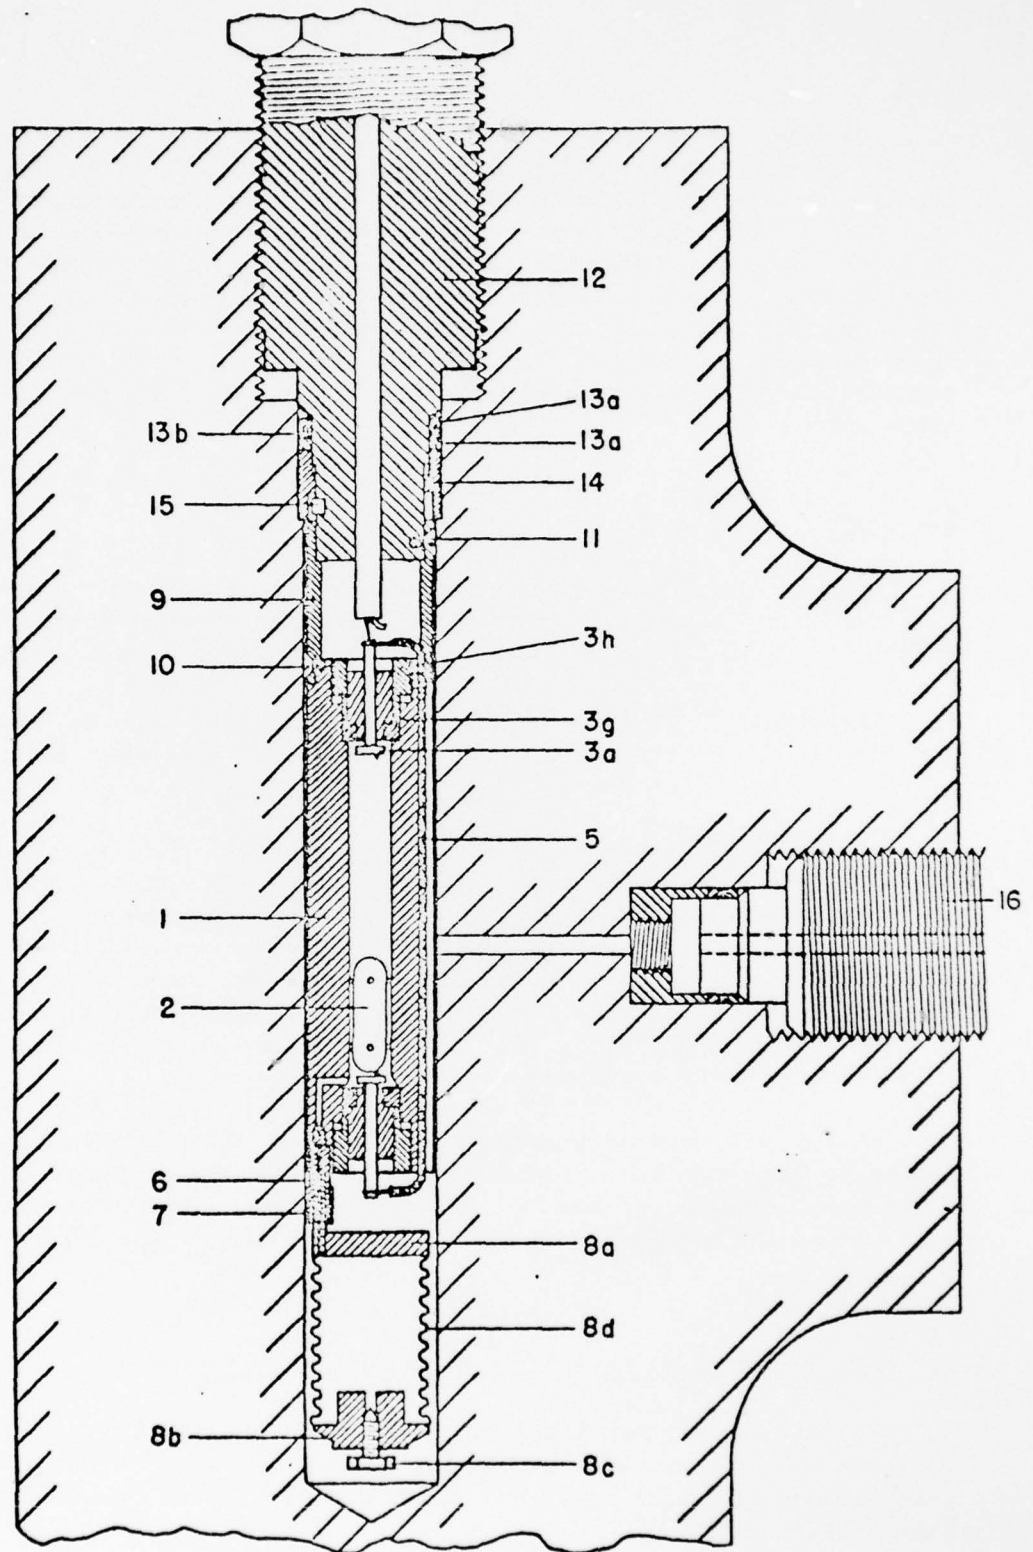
Cross Section of the Falling Weight Fixture in Place
